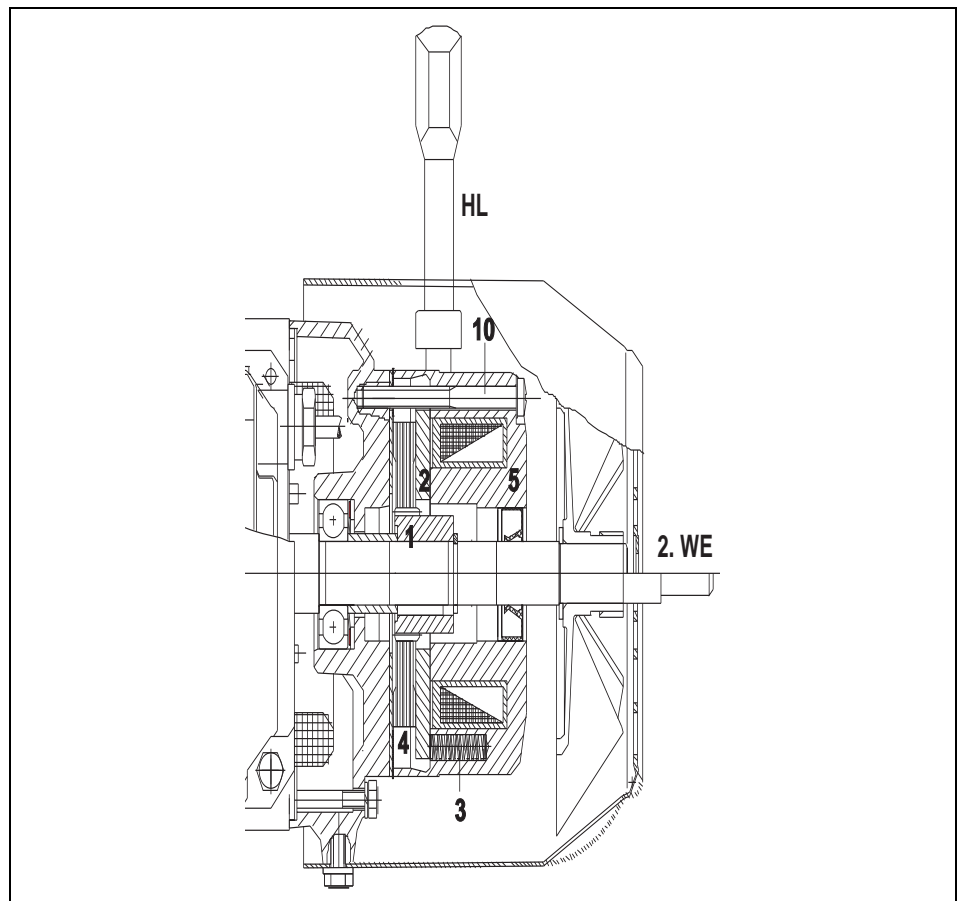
Single-disc spring-loaded brake with D.C. solenoid release
